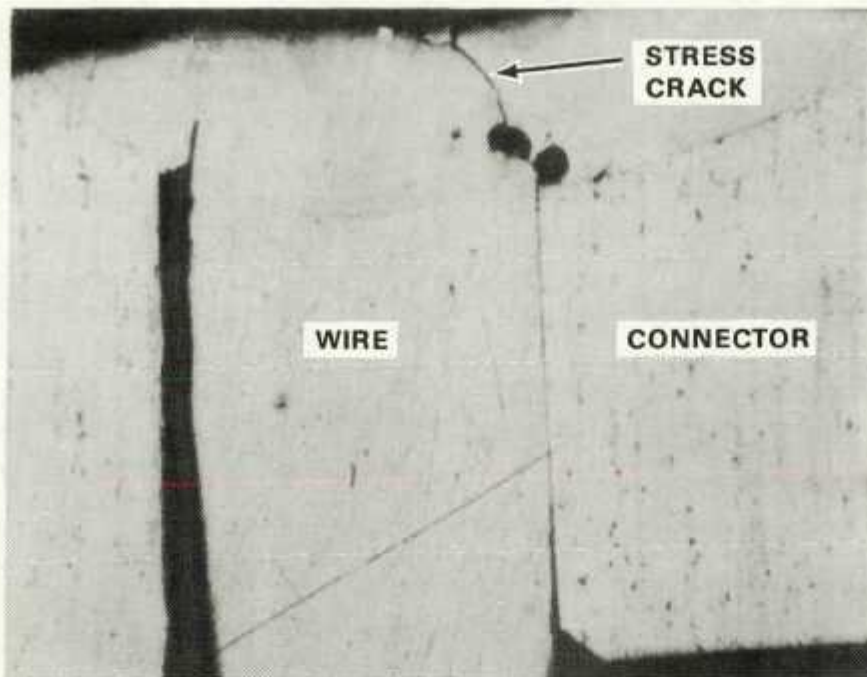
Cross Section of Stress Cracking in a Weld
